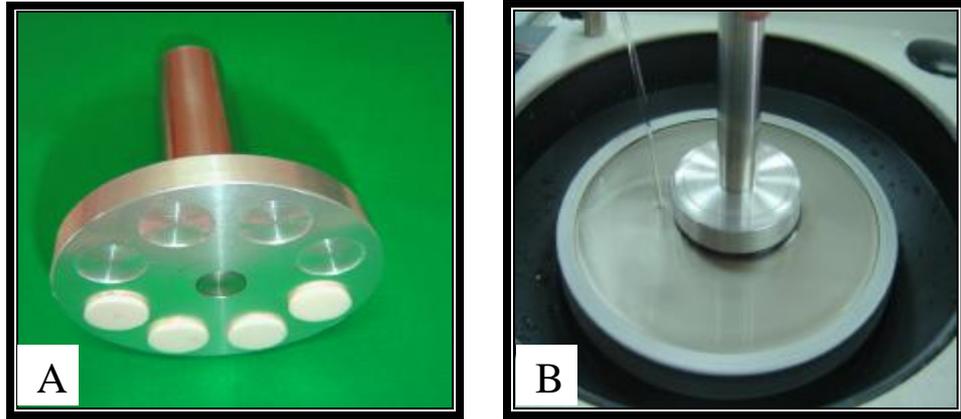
The ceramic discs fixed to the specimen holder (A) and the specimen holder during grinding (B).
